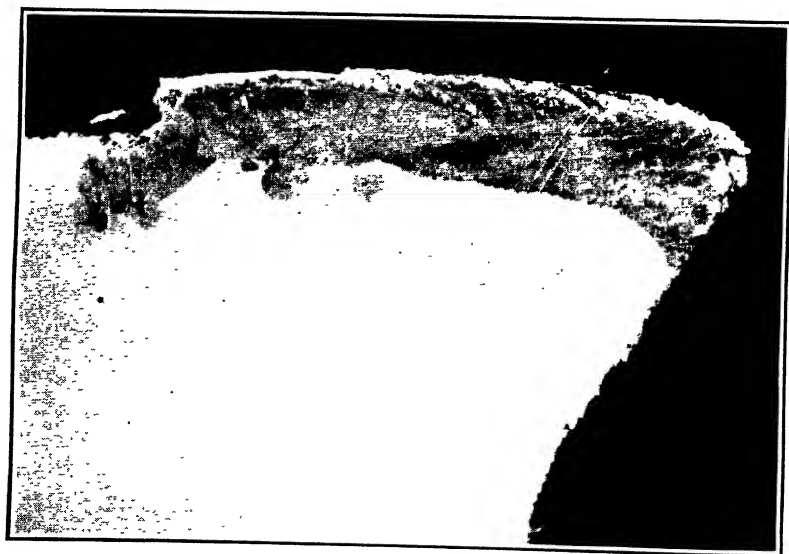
LONGITUDINAL SECTION OF RISER OF A MEDIUM-SIZED CASTING.
